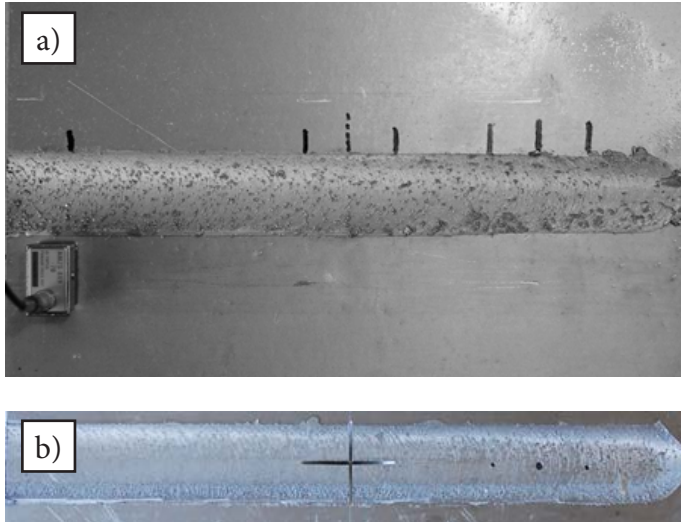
Test plate made using the FSW method, a) side subjected to testing, b) side containing the imperfection presented in Figure 8
